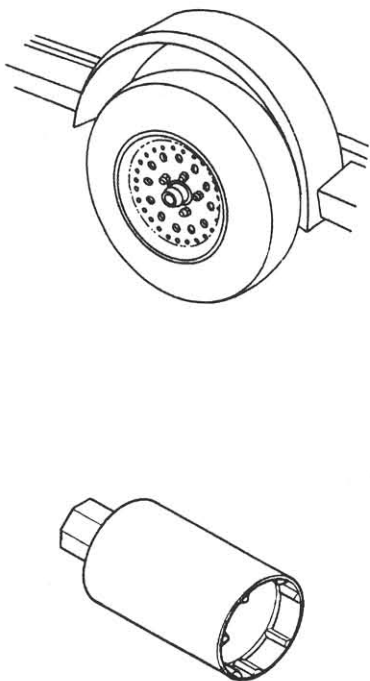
Mag Wheel & Mag Wheel Key (Socket)
